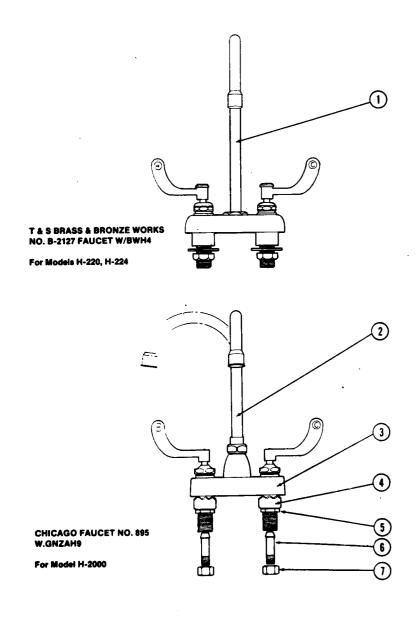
FAUCET ASSEMBLY WITH GOOSENECK SPOUT.
